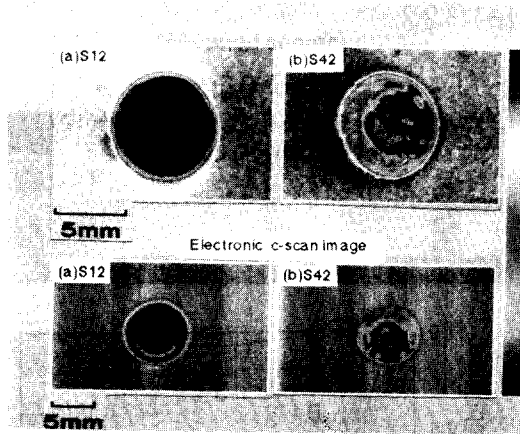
Mechanical and electronic c-scan image of spot welds
